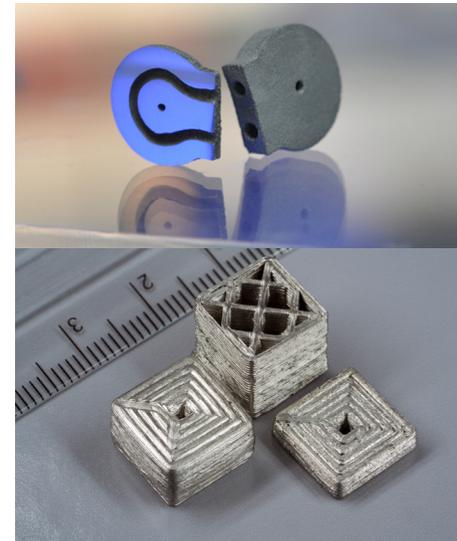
BJ (top) and FFF (bottom) printed hard metal parts (© Fraunhofer IKTS)
